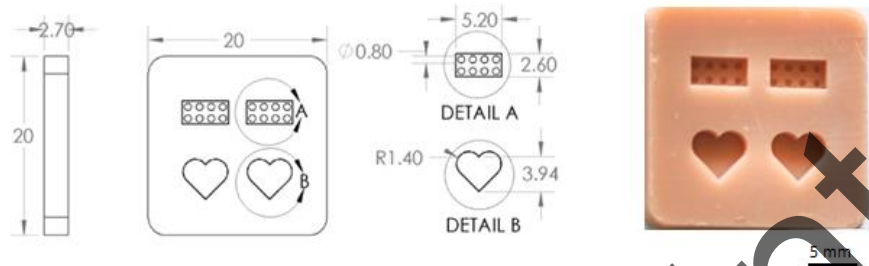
(a) Drawing of insert and details (dimensions in mm) (b) printed insert
